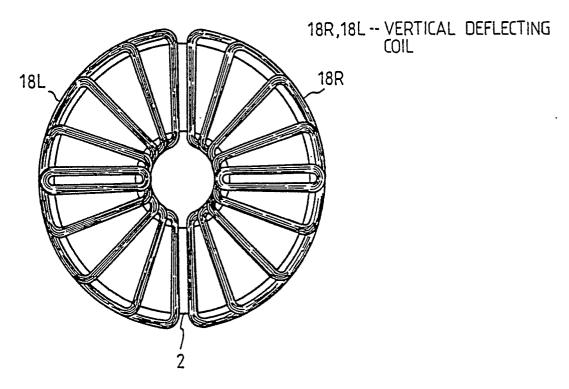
B PLANE VIEW SHOWING VERTICAL DEFLECTING COILS
